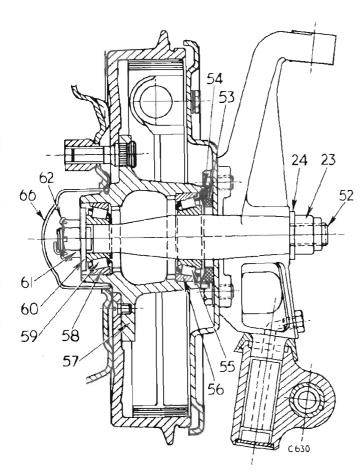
Cross section of Herald 1200 drum brake and hub assembly
